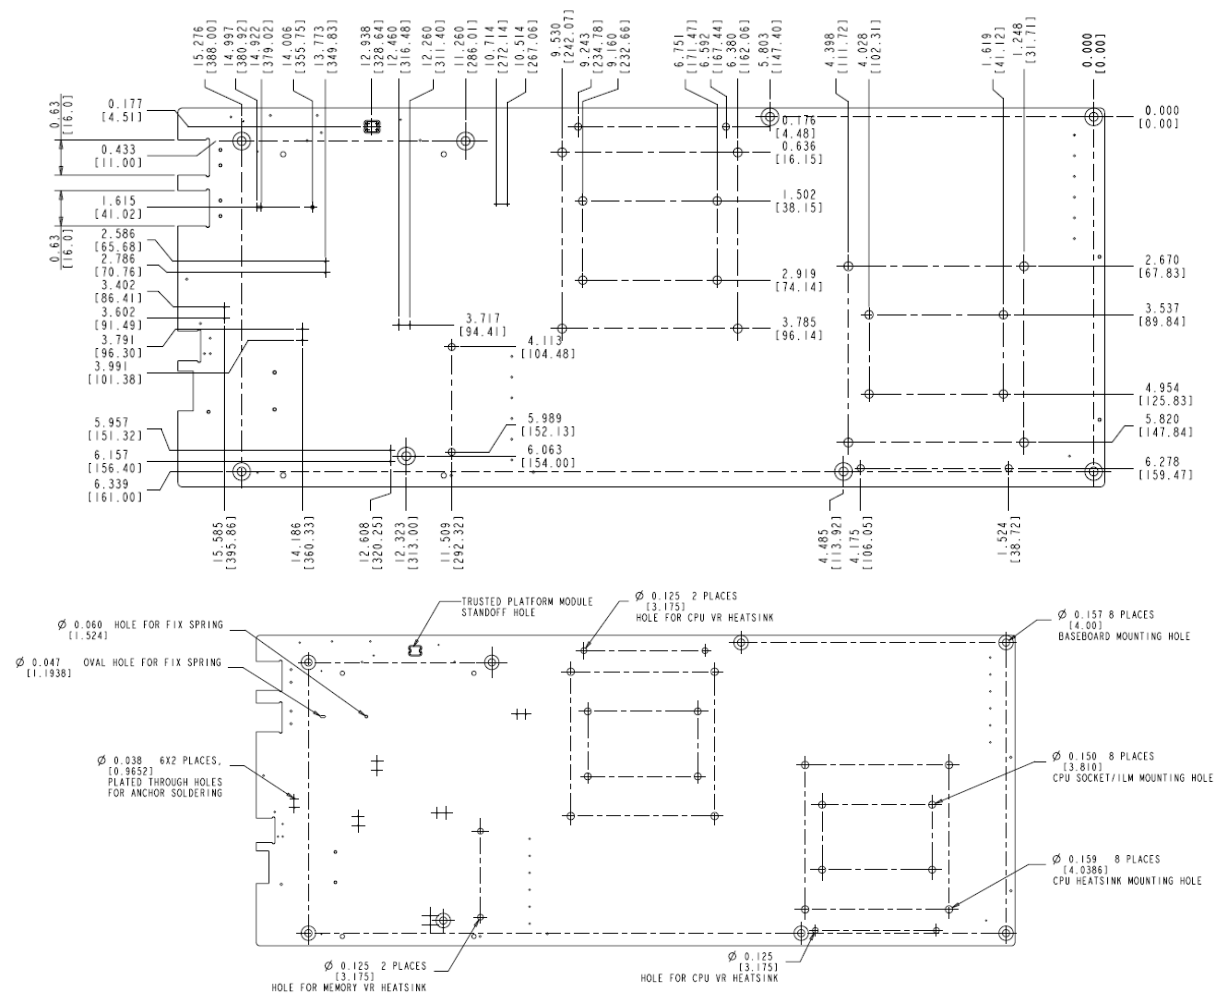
Intel® Server Board S2400LP – Mounting Holes Locations
